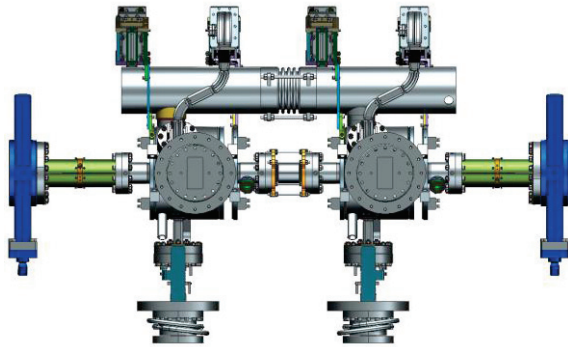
A model of the SPX R&D cryomodule clean room cavity string with warm-to-cold transitions called out in green and the warm gate valves called out in blue. Note that the helium header is included because it must be assembled in the clean room with the HOM waveguides.
